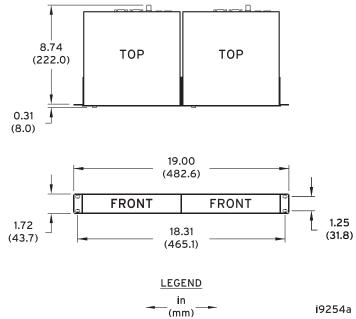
SEL-3530-4 Horizontal Rack-Mount (Side-by-Side) Dimensions
